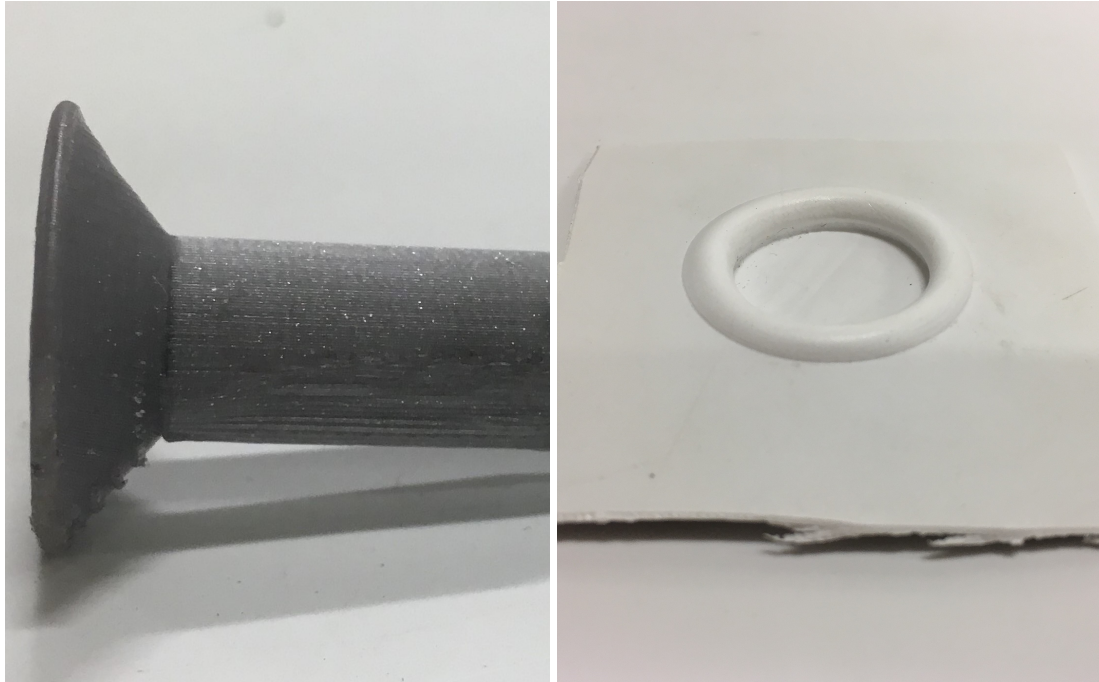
Pin and vacuum formed part after detachment. The deformed stem of the tap is caused by the grips on the test jig.
